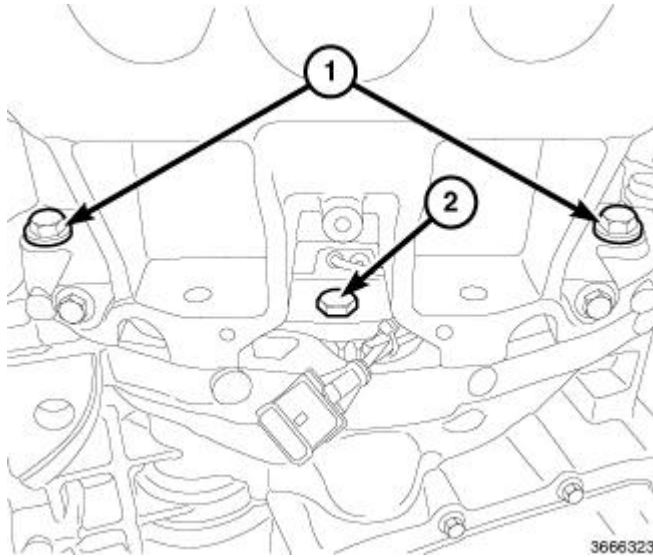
Oil Pan To Transaxle Bolts & Flex Plate-To-Torque Converter Bolts
